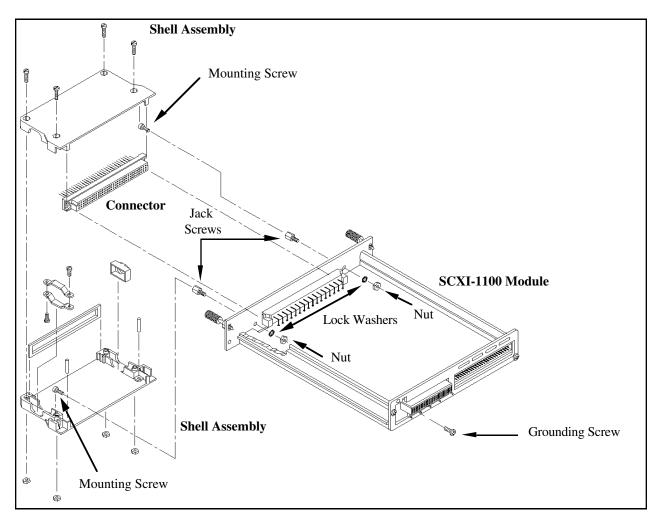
Assembling and Mounting the Connector-and-Shell Assembly
